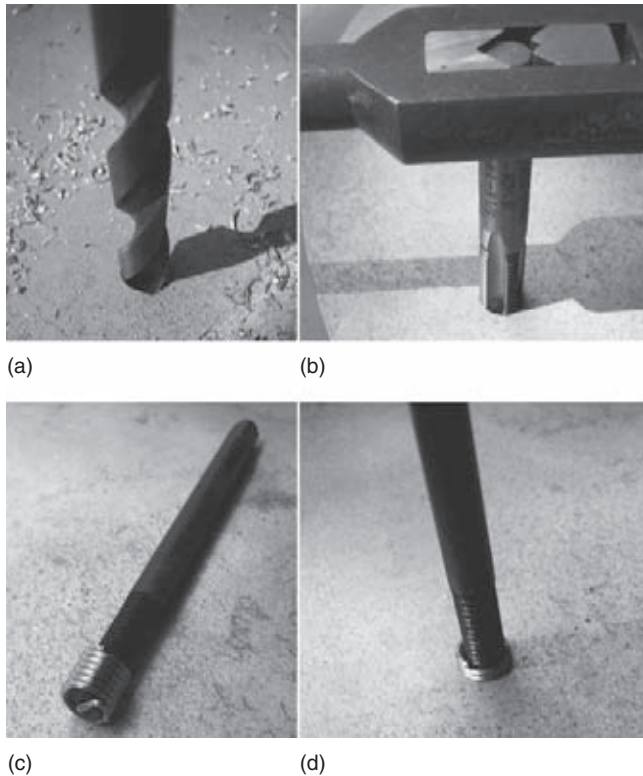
Step 1 in repairing damaged threads is to drill a properly sized hole for the special tap (a). Step 2 is to use the special tap to cut new threads (b). Step 3 is to put the thread insert on the installing tool (c). Step 4 is to screw the insert into the new threads (d). The final step (not shown) is to break off the insert's installing tang.
